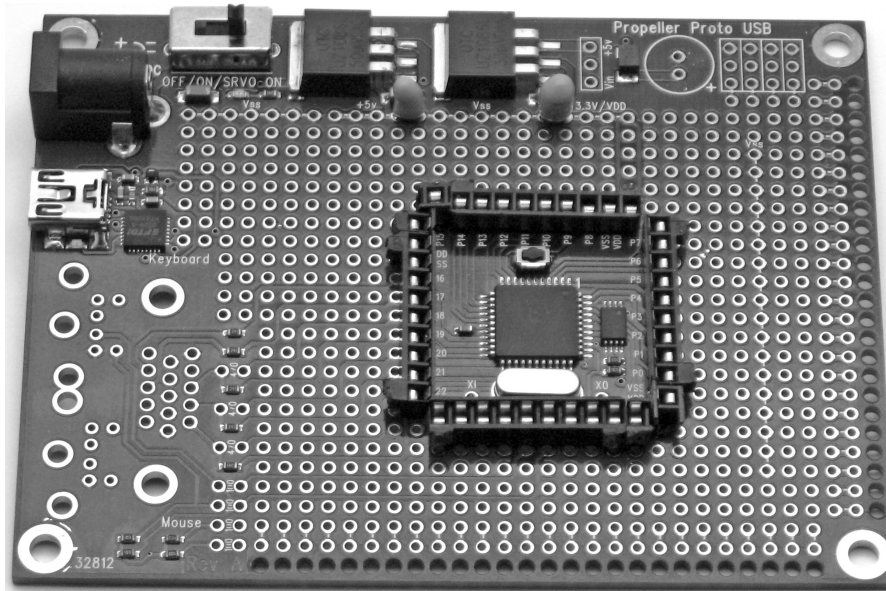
Female .100" headers soldered onto the Propeller USB Proto Board.
